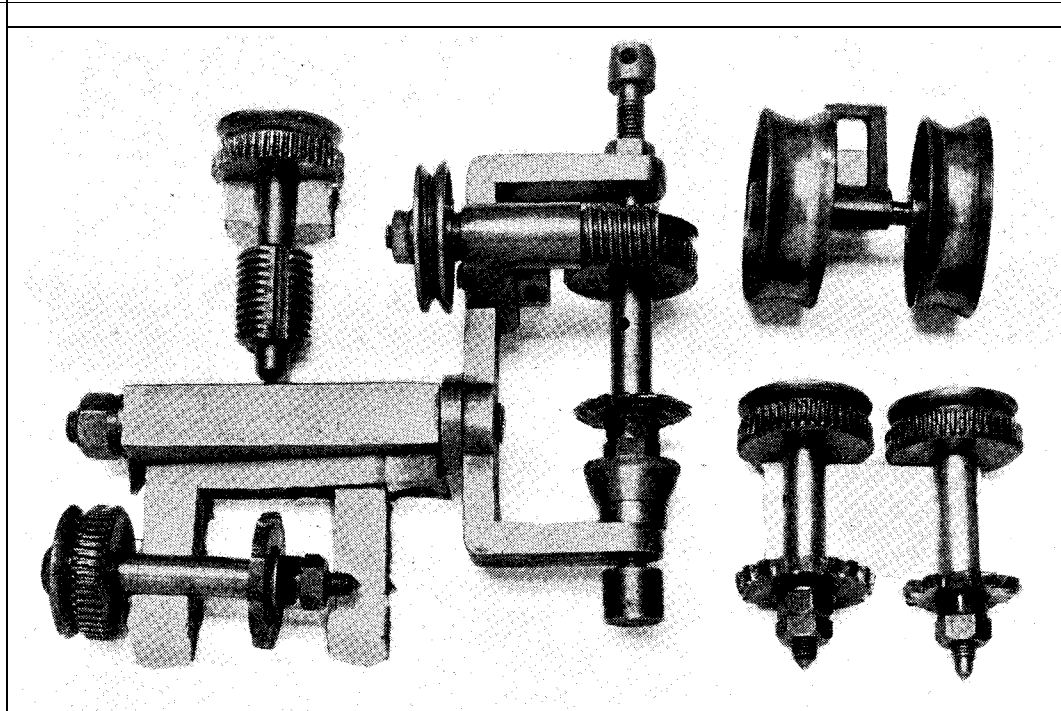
Fig. S.-A Cutter Frame with Worm Geared Drive for Working on Steel. The Hob for Cutting the Worm Wheels is also shown.
